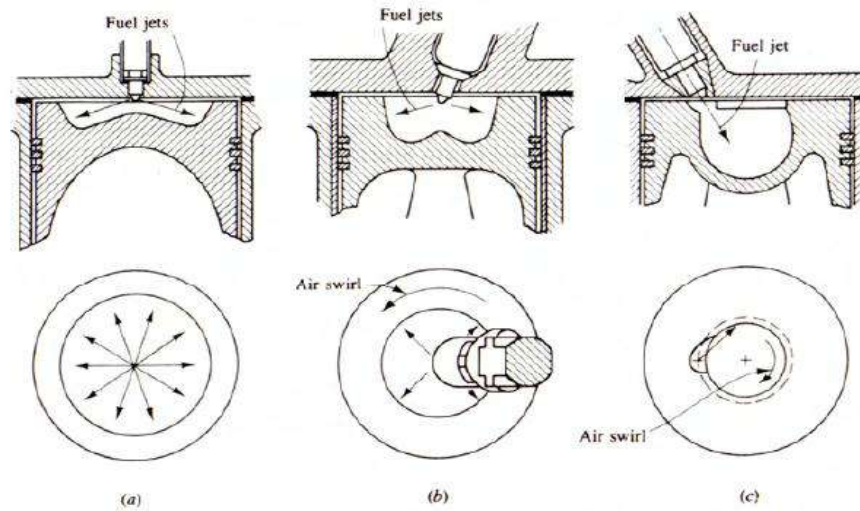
Common types of DI engine combustion systems. (a) Quiescent chamber with multi-hole nozzle (b) Bowl-in-piston chamber with swirl and multi-hole nozzle (c) Bowl-in-piston chamber with swirl and single-hole nozzle [3].
